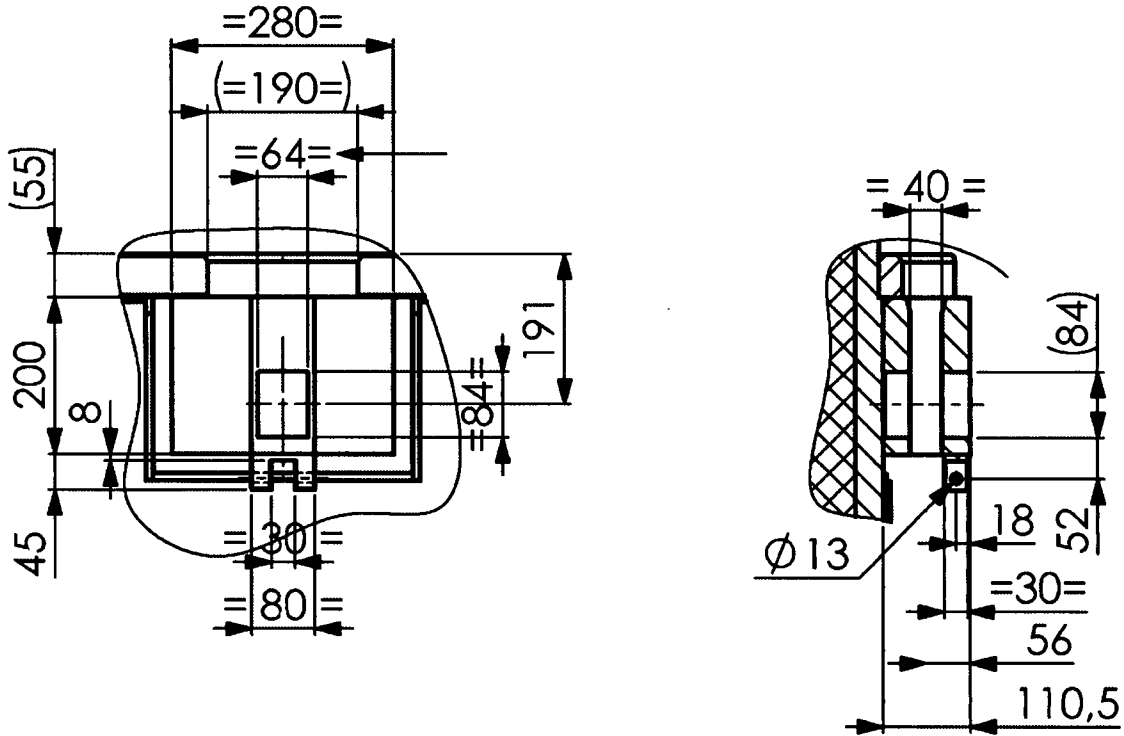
RT-100 Lifting Pocket Dimensions
